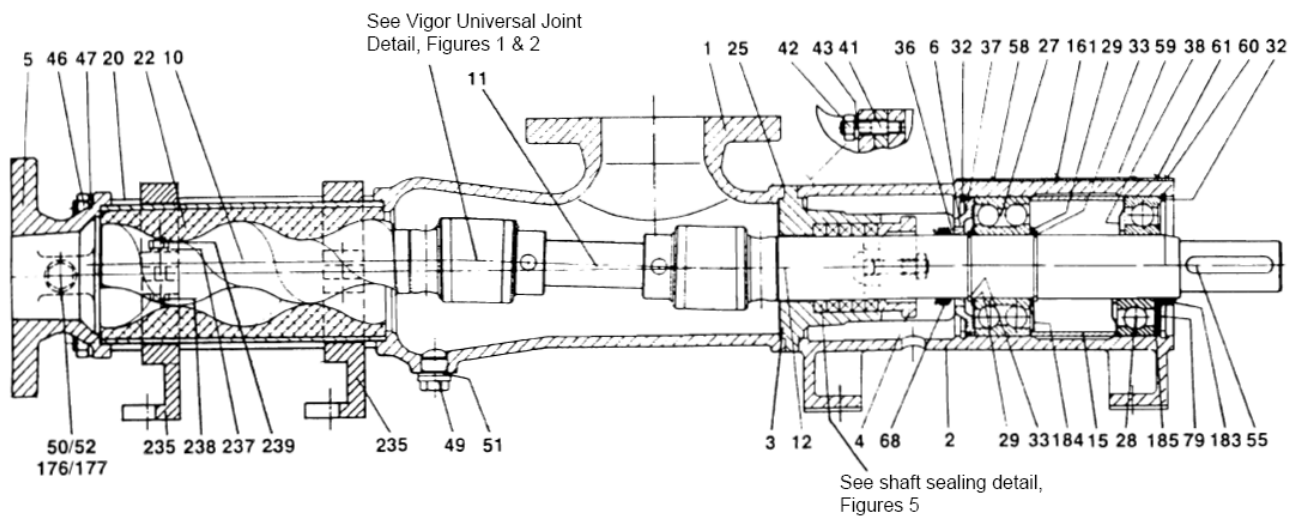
Vigor PC Pump Cross-Sectional Drawing
